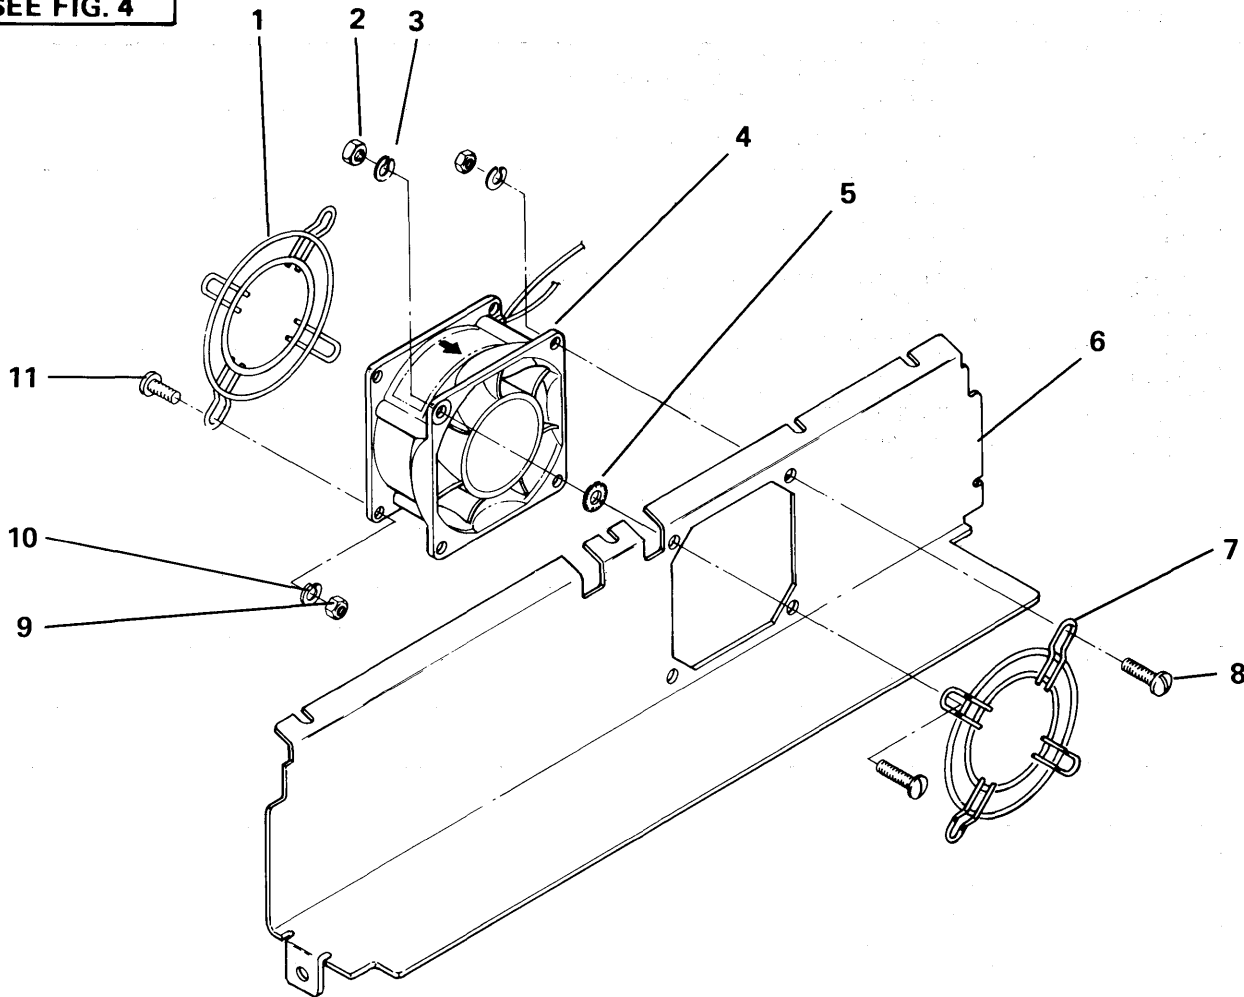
FAN ASSEMBLY. SEE LIST 9.
